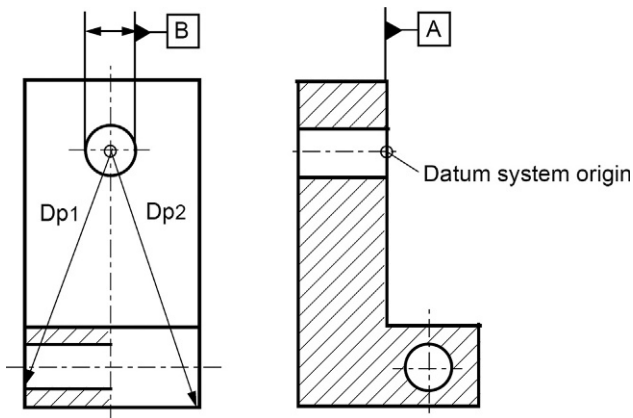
General tolerances for plastic parts Dp dimension for surfaces (not axes) nominally maximum spatial distance of toleranced feature from datum system origin
